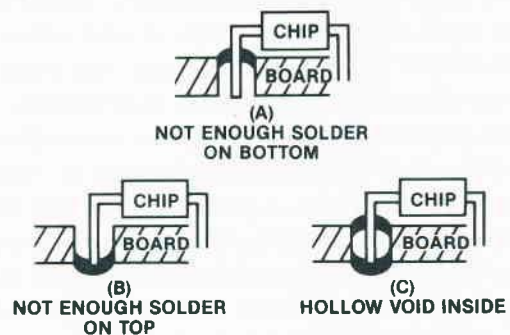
Examples of inadequate soldering on a printed-circuit board.
